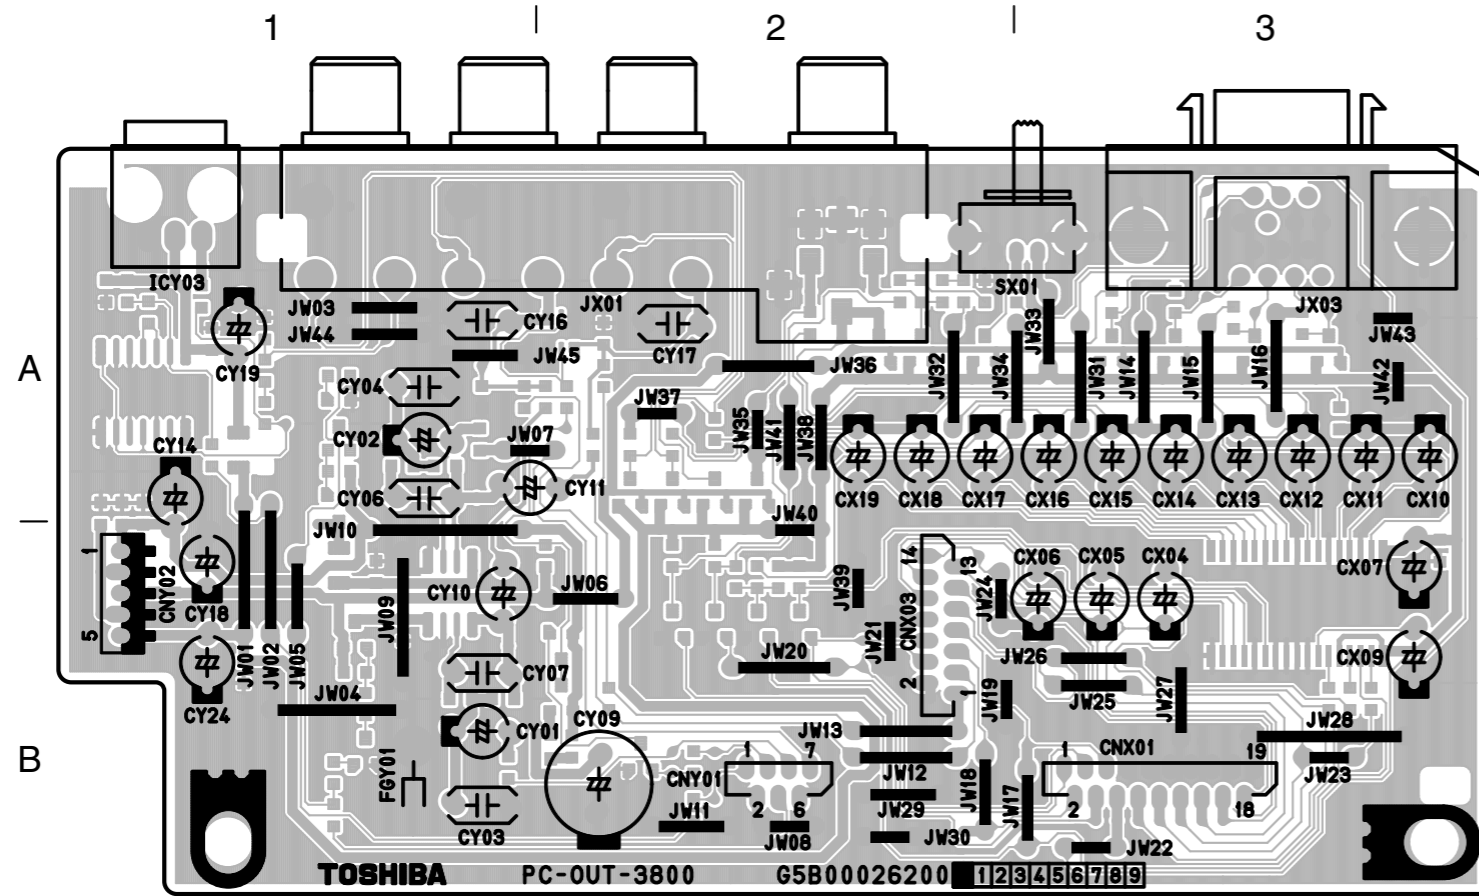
A EU05 Output PC Board (Top side)
